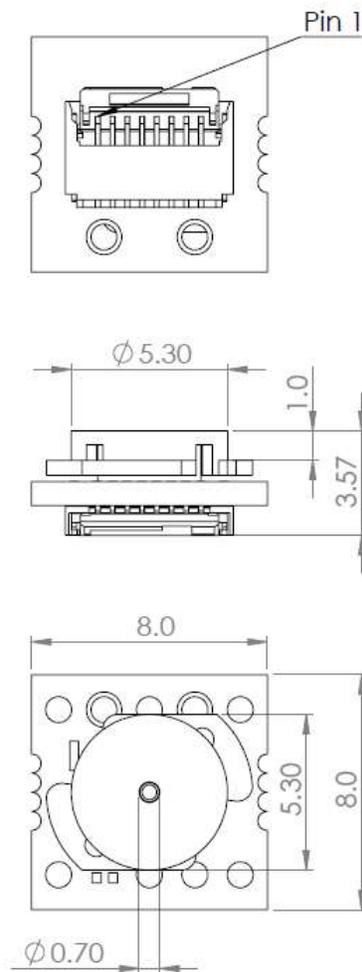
Main dimensions of the MOD_CH101-03-01 assembly
